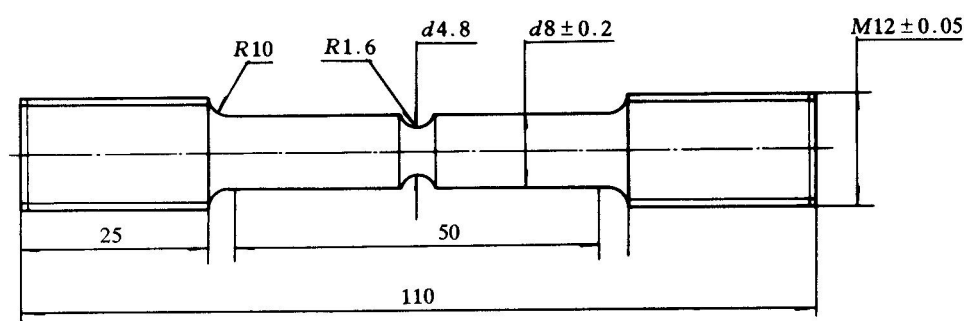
Notched specimen used for multi-axial creep test (unit: mm)
